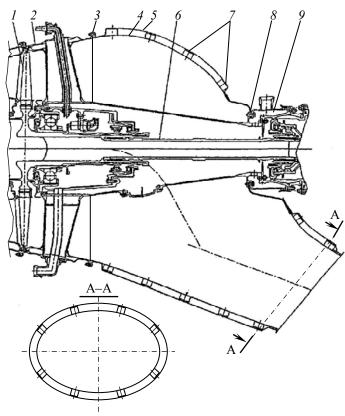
Exhaust nit of TB3-117BMA-CBM1 engine: *1* — power turbine blade; 2 — power turbine bearing casing; *3* — exhaust pipe front flange; 4 — exhaust tube wall; *5* — heat-reflecting jacket; 6 — output shaft of engine;
